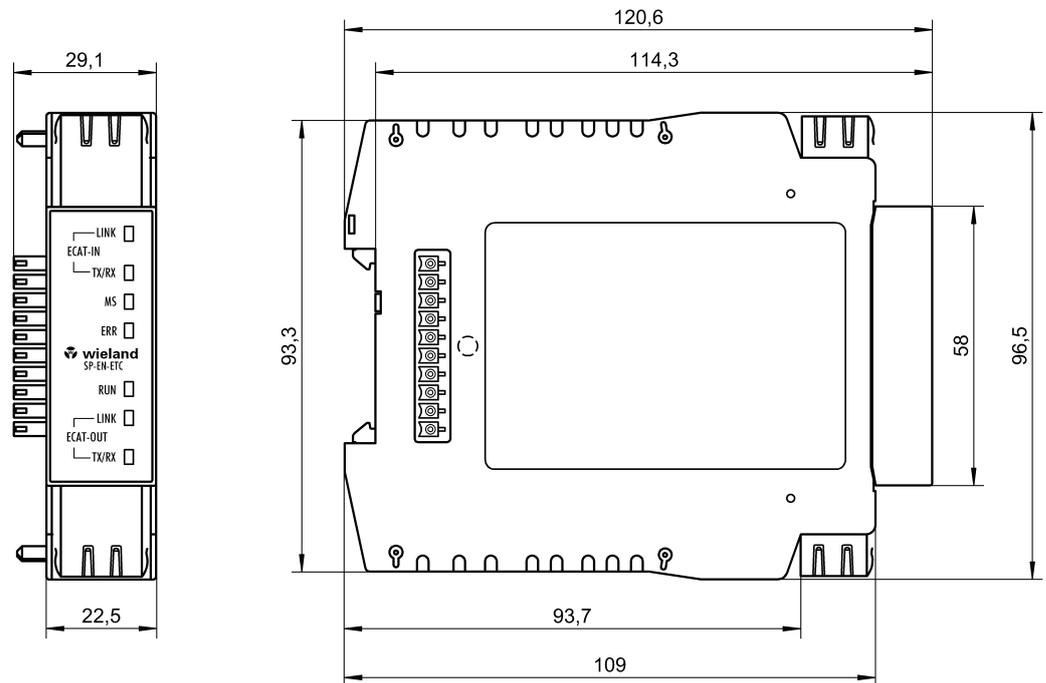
Dimension drawing of EtherCAT gateway SP-EN-ETC (mm)
